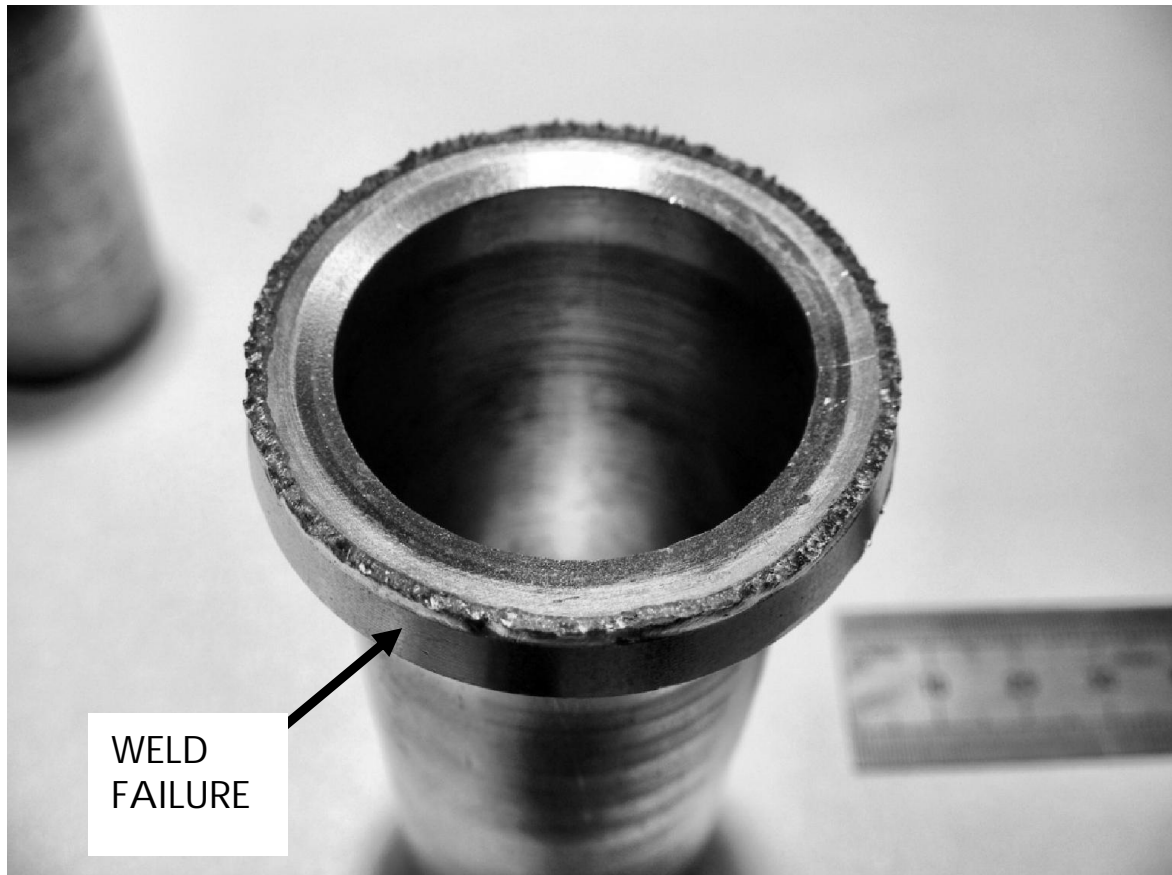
Sample following tensile testing – the failed electron beam weld is indicated with 1.2 mm penetration
